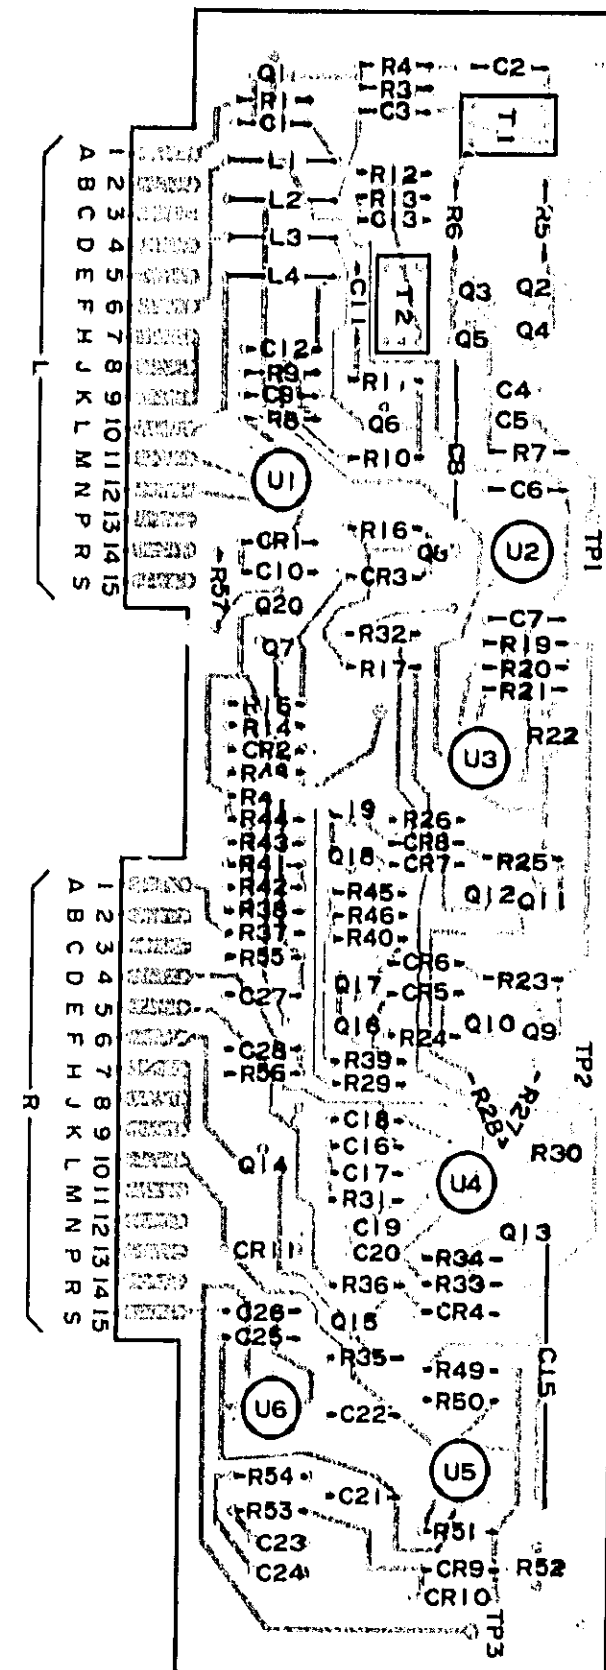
A6 C/L Synchronous Detector &amp; Integrator Board Assembly Component Locations.
